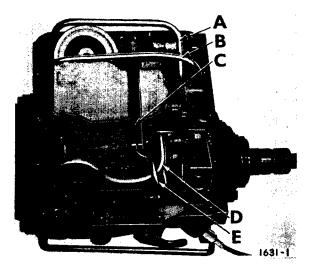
View of the Model 8 Transmission unit inverted with the oil pan removed showing tube location
